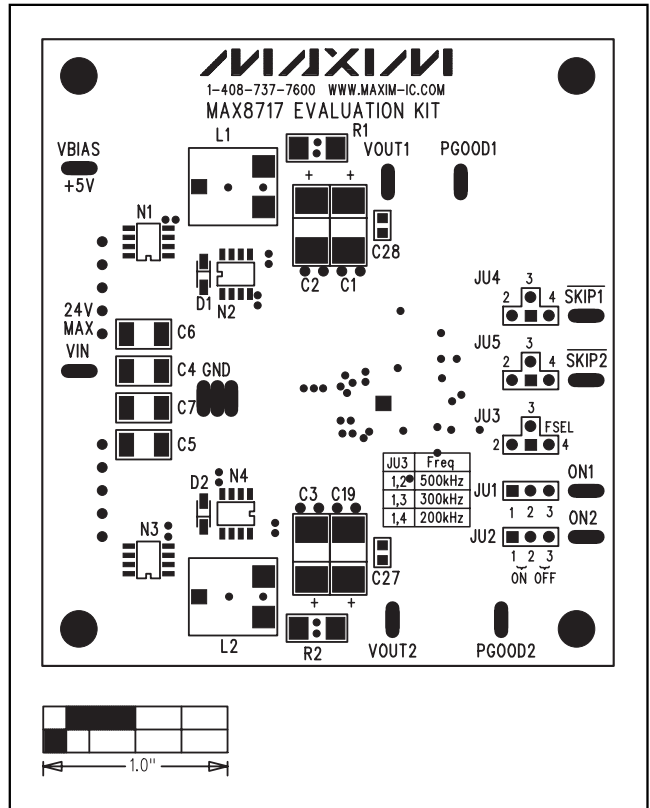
MAX8717 EV Kit PC Board Layout—Top Silkscreen
